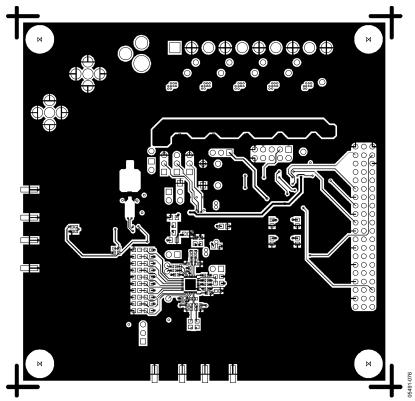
Evaluation Board Layout, Secondary Side (Mirrored Image)
